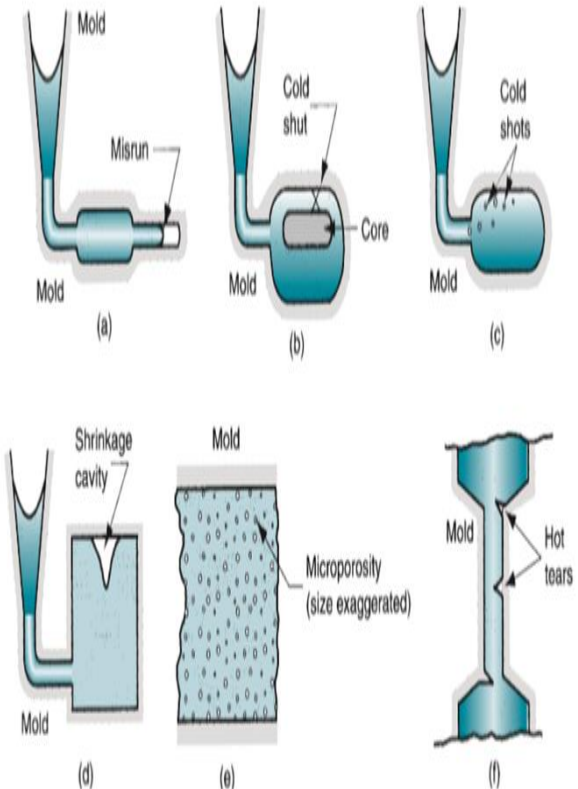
Some common defects in castings: (a) misrun, (b) cold shut, (c) cold shot, (d) shrinkage cavity, (e) microporosity, and (f) hot tearing.
